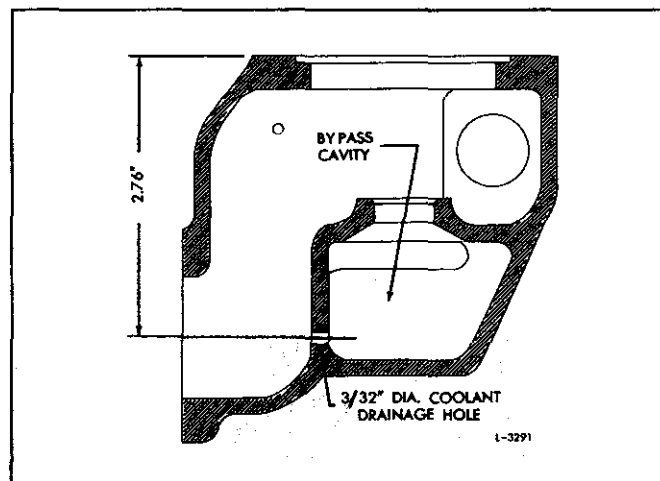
Cross-Section of Thermostat Housing (Early Industrial In-line Engine)
